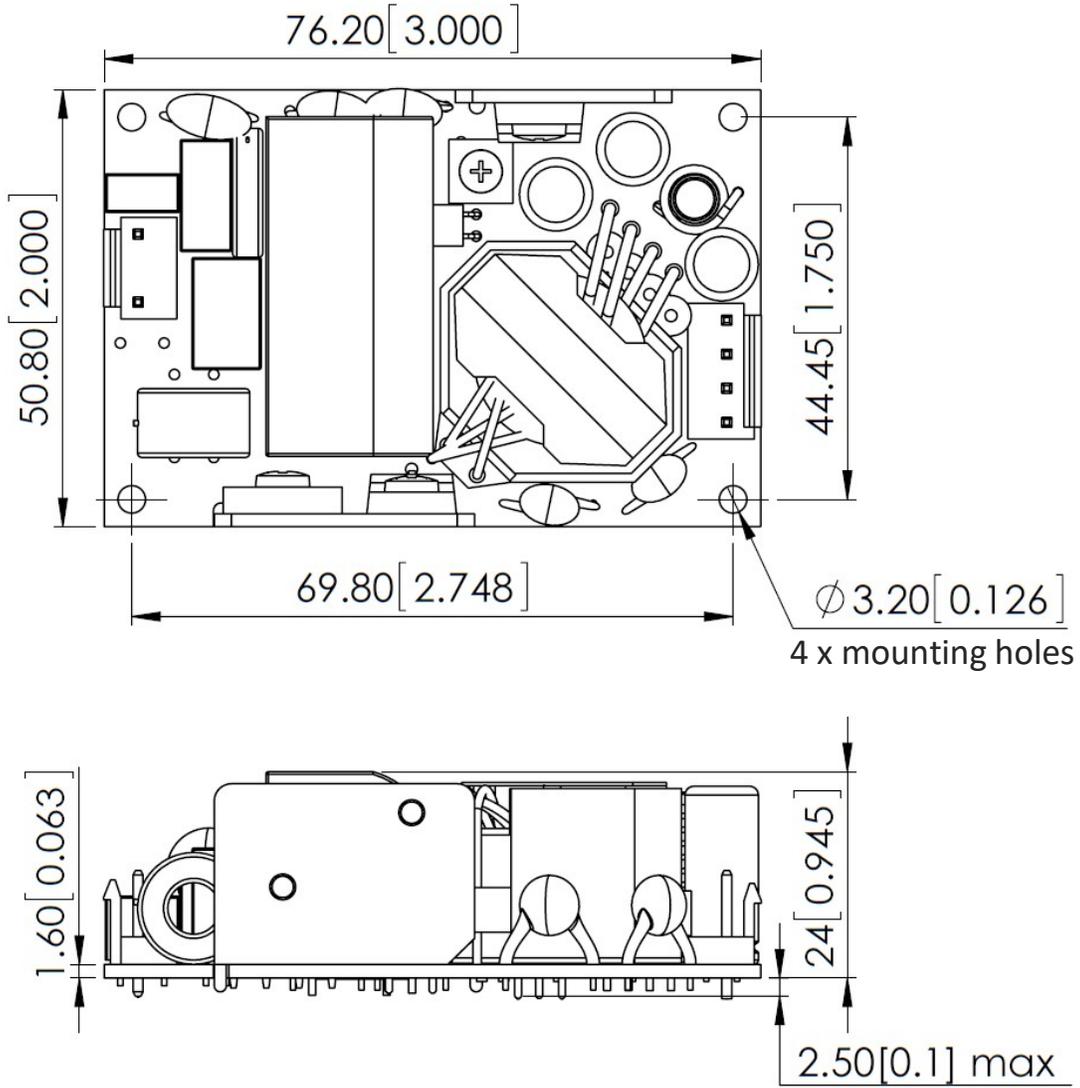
MLO40 models: Mounting Hole Locations and Dimensions
